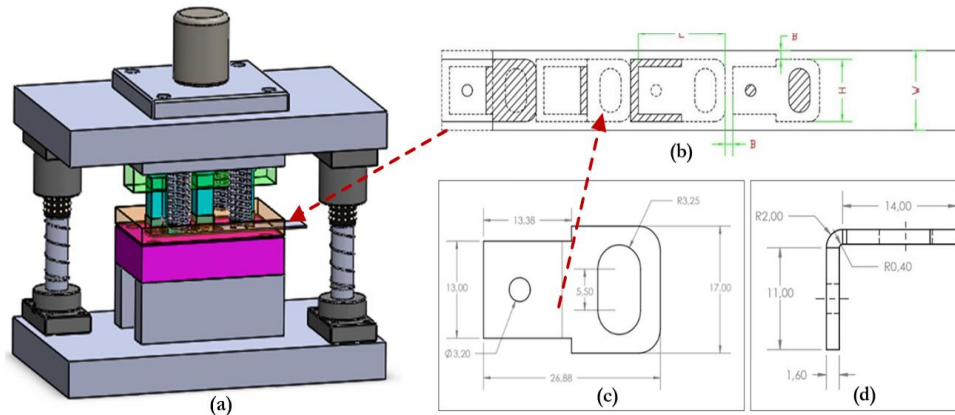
Dies L-HD product-all dimension in mm: (a) Dies assembly (b) Layout strip, (c) Blank L-HD (d) Bending
